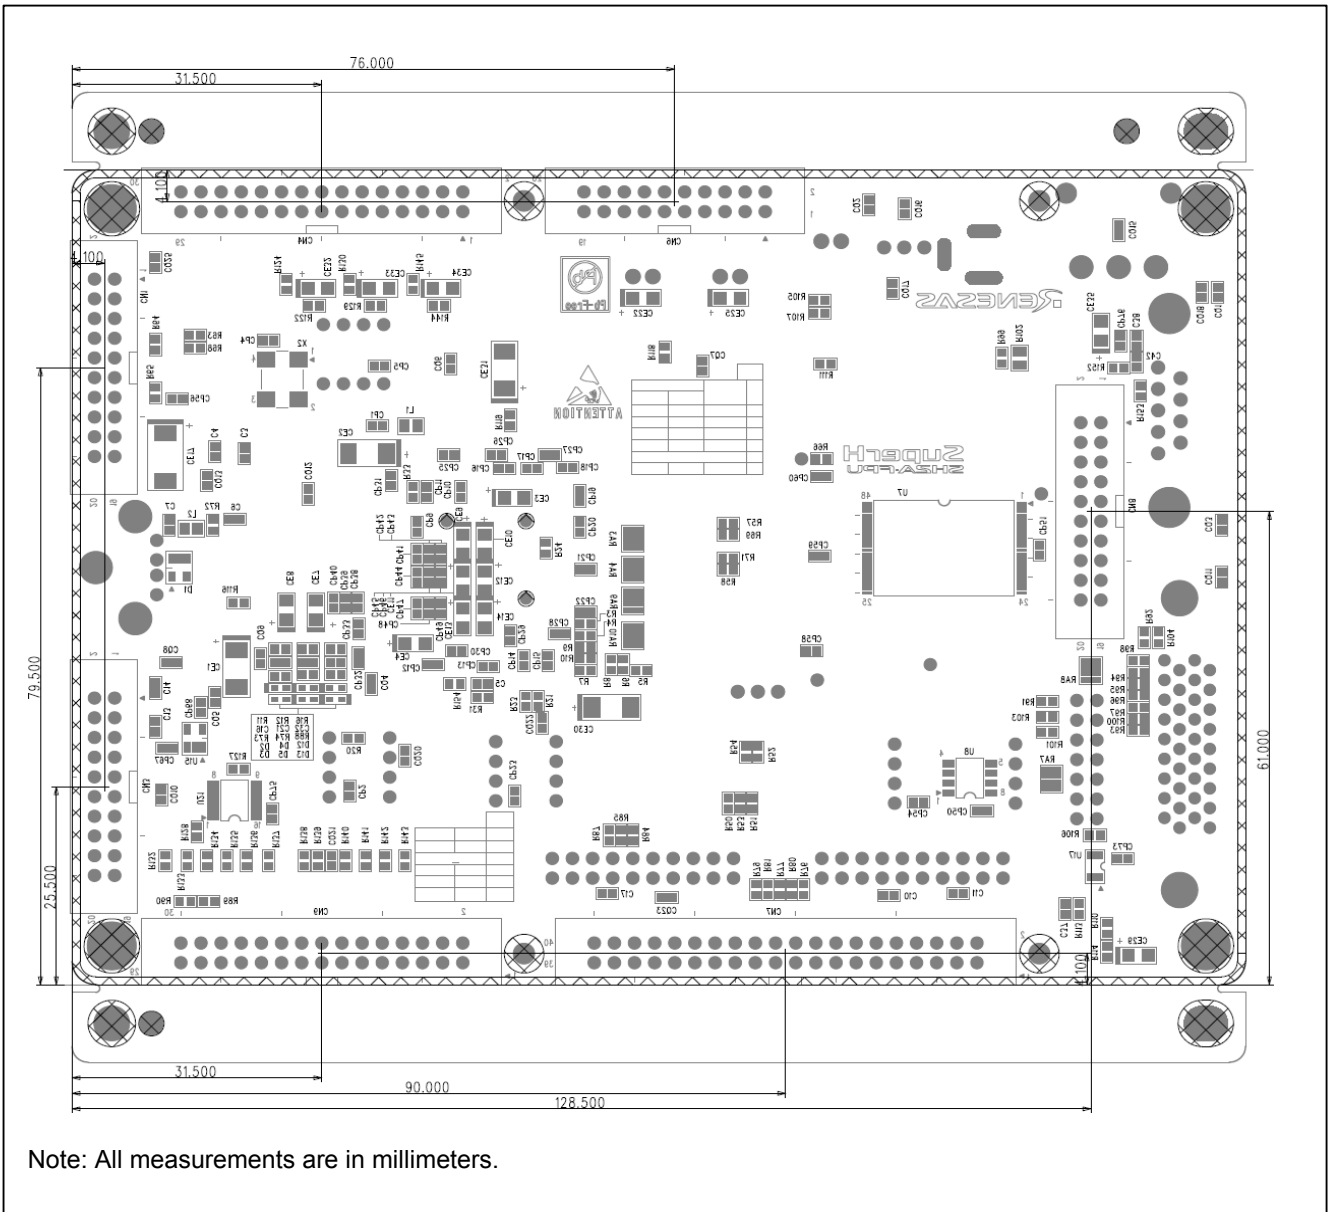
R0K572670C000BR Dimensions (Transparent View of the Component Side)
